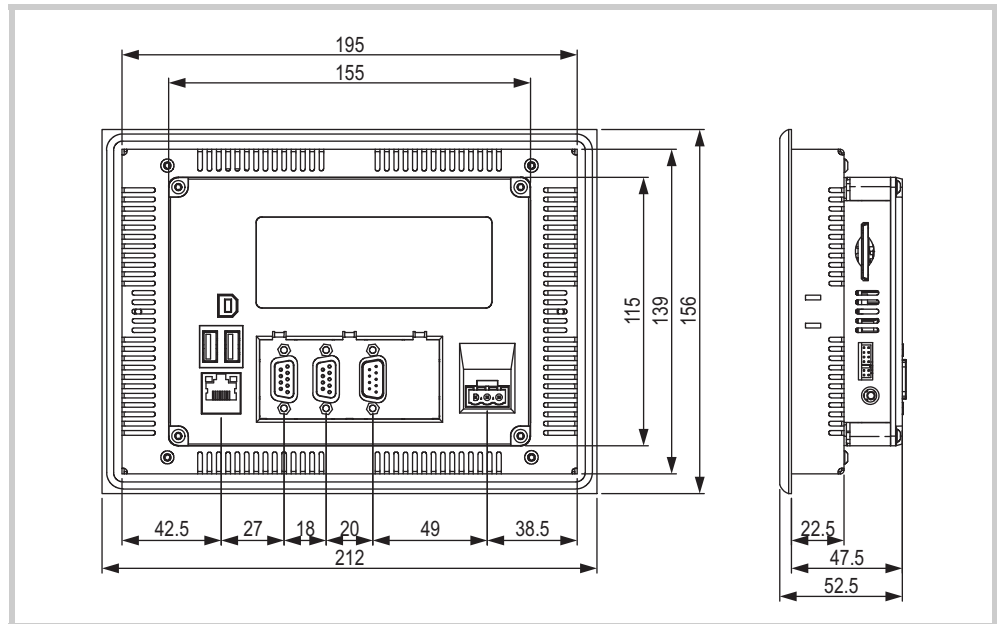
Mechanical dimensions of the 5.7" devices in mm
